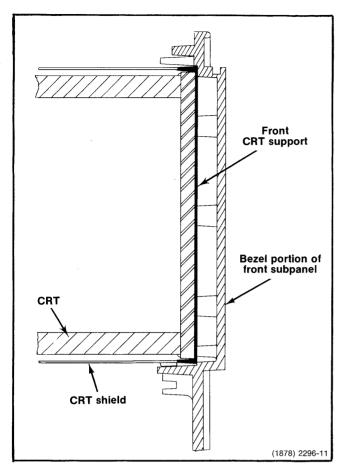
Cross sectional view showing placement position of front crt support, crt shield and crt.
